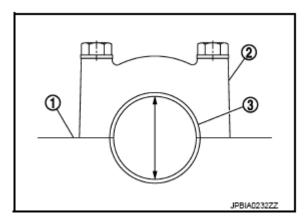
Measuring Inner Diameter Of Main Bearing Courtesy of NISSAN NORTH AMERICA, INC.
